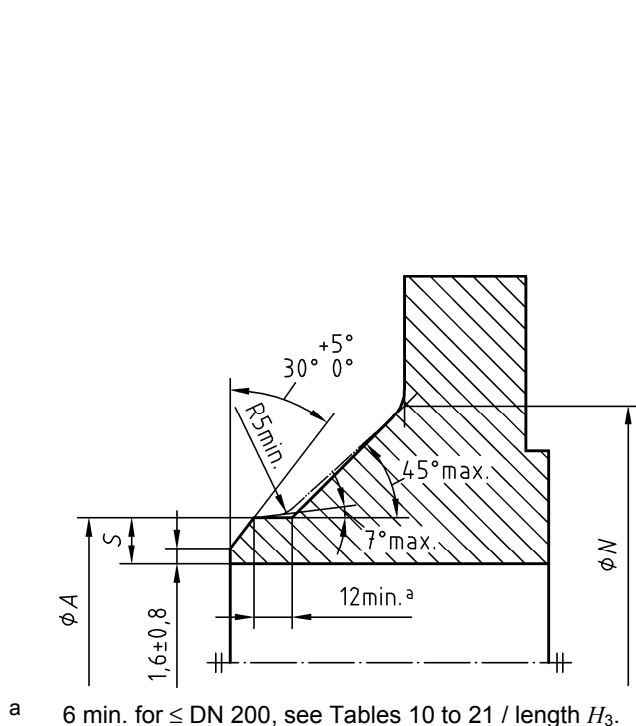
Welding end connection for wall thickness  $S$  up to 22 mm
